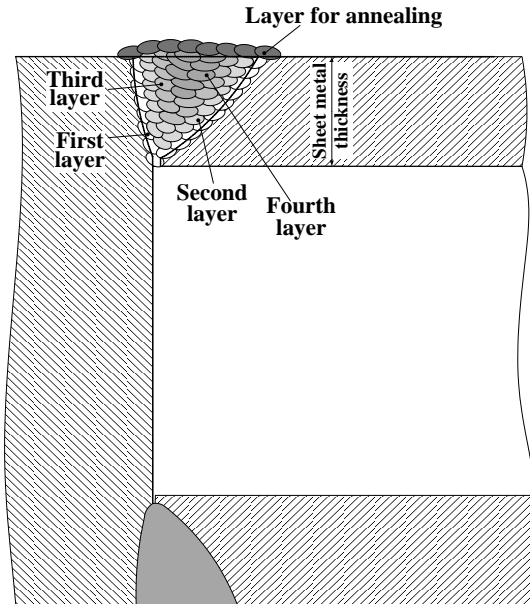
Appearance of the order of deposition of weld beads along the cross-section of the guide vane apparatus vane
